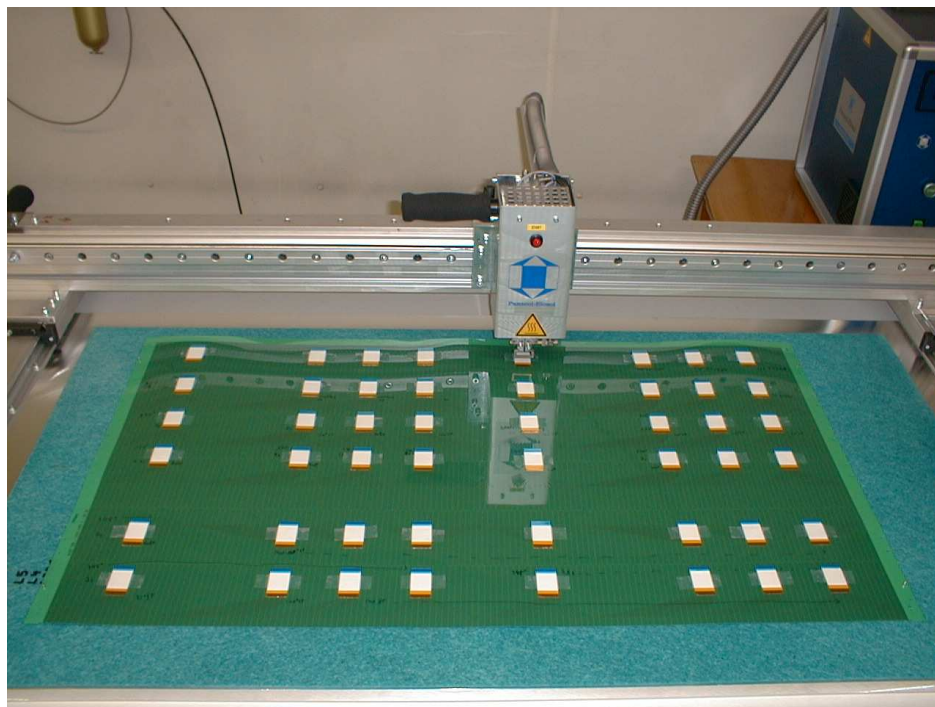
A piece of pad plane PCB is aligned in the pad plane soldering machine. Eight flat cables per row are positioned on the respective footprints. The soldering gun is located at the bottom of the cuboid box.
